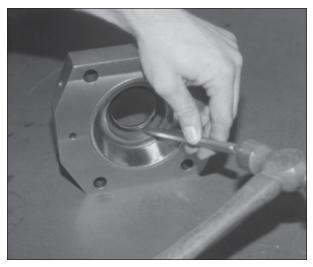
Remove top and bottom grease seals from top and bottom plates.
